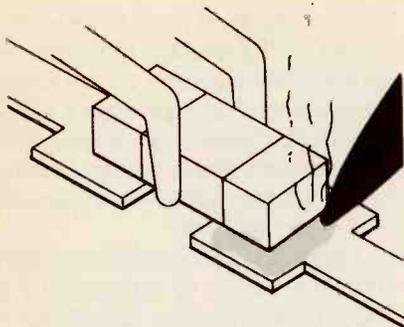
To tag solder a two-terminal SMC in place, create a pool of solder on a pad, place the component above it, and reheat the solder so the SMC can "sink" close to the board surface.
